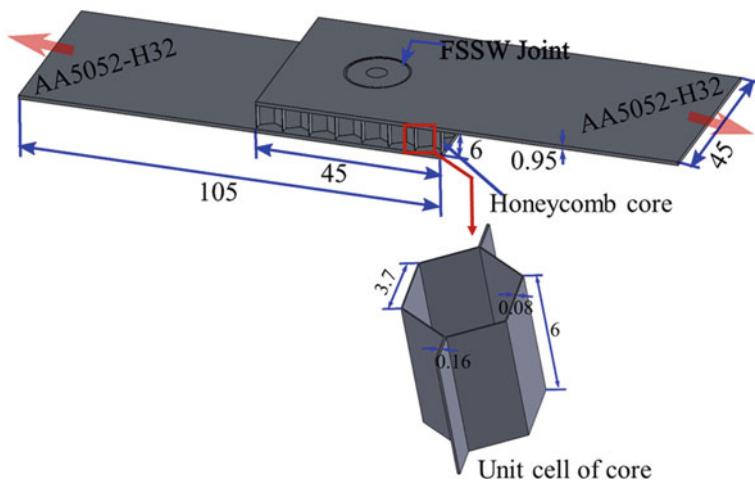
Lap-shear specimen (all dimensions are in mm)
